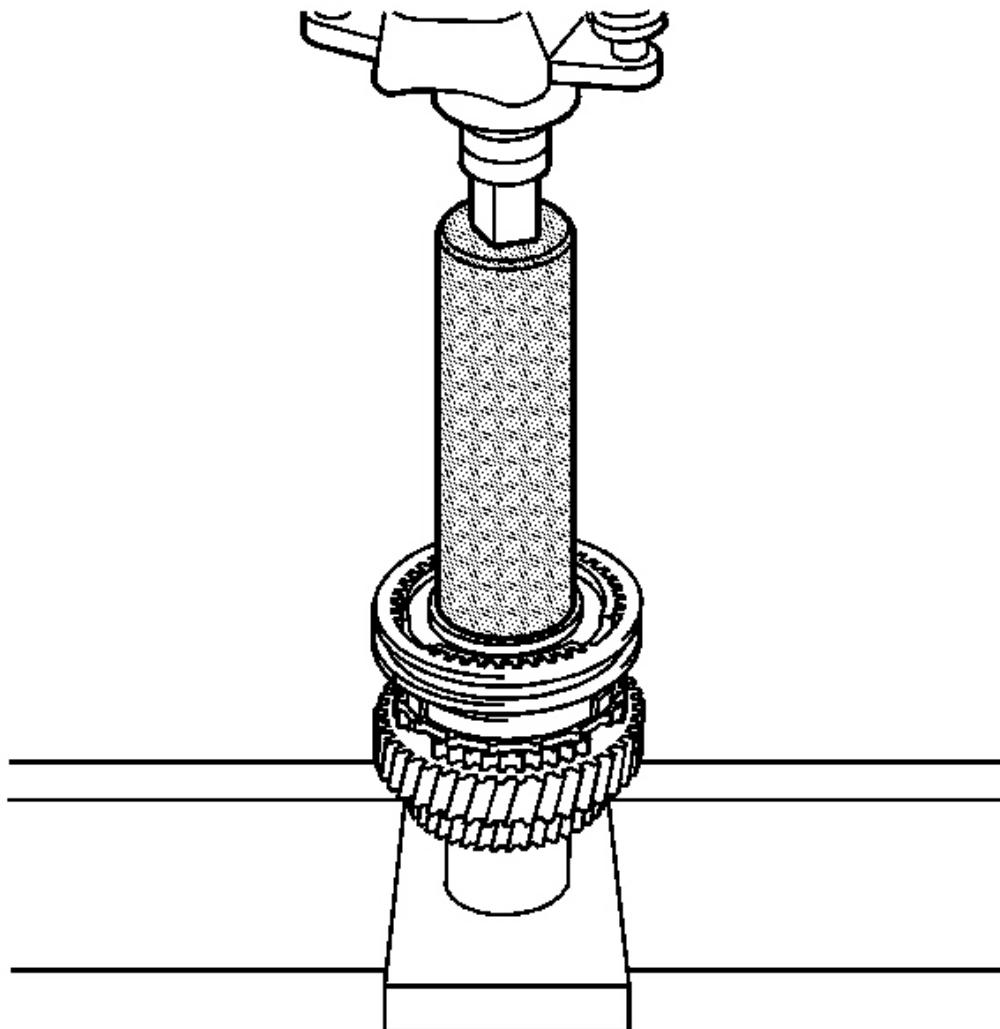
Installing 1st/2nd Gear Synchronizer Sleeve
